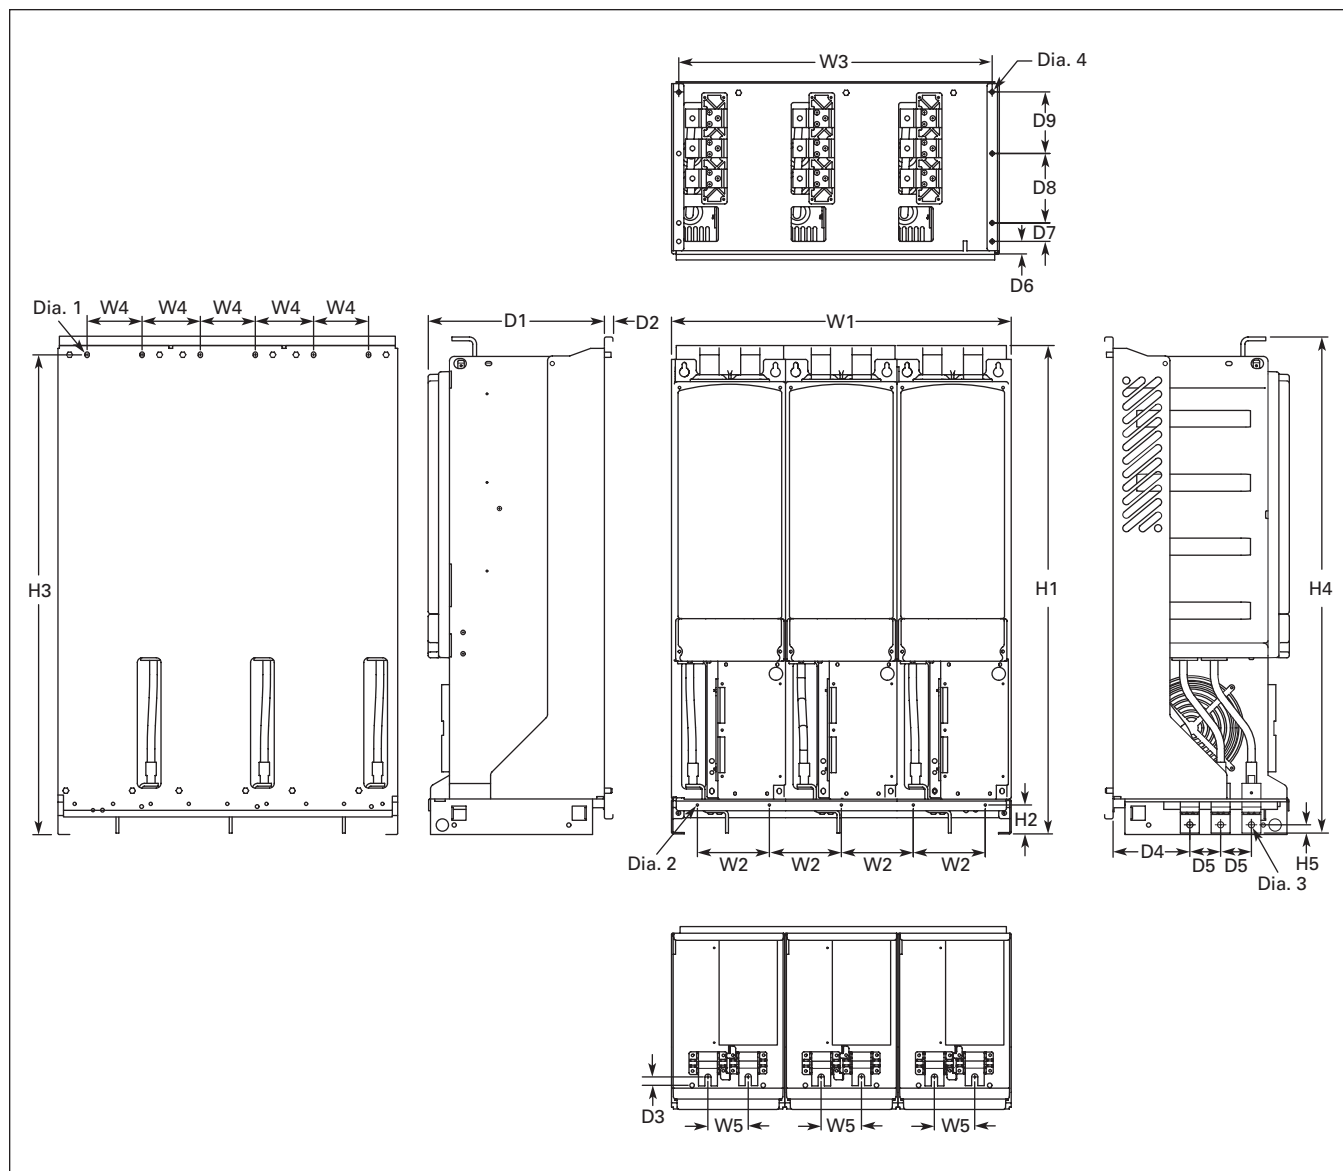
9000X Dimensions, FR13 Open Chassis Converter — 900/1000 hp 480V
